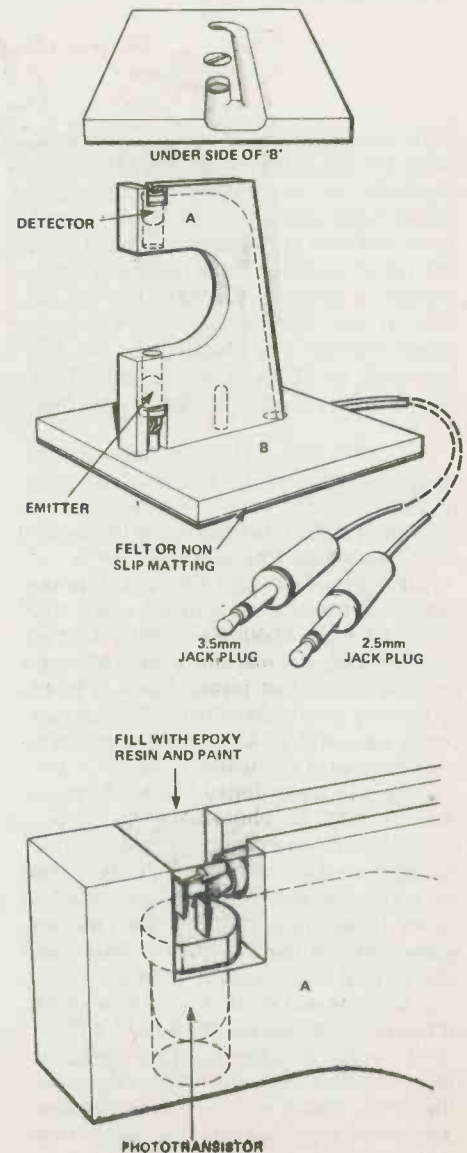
Constructional details of our sensor. Using different sized jack plugs will prevent incorrect connection.
